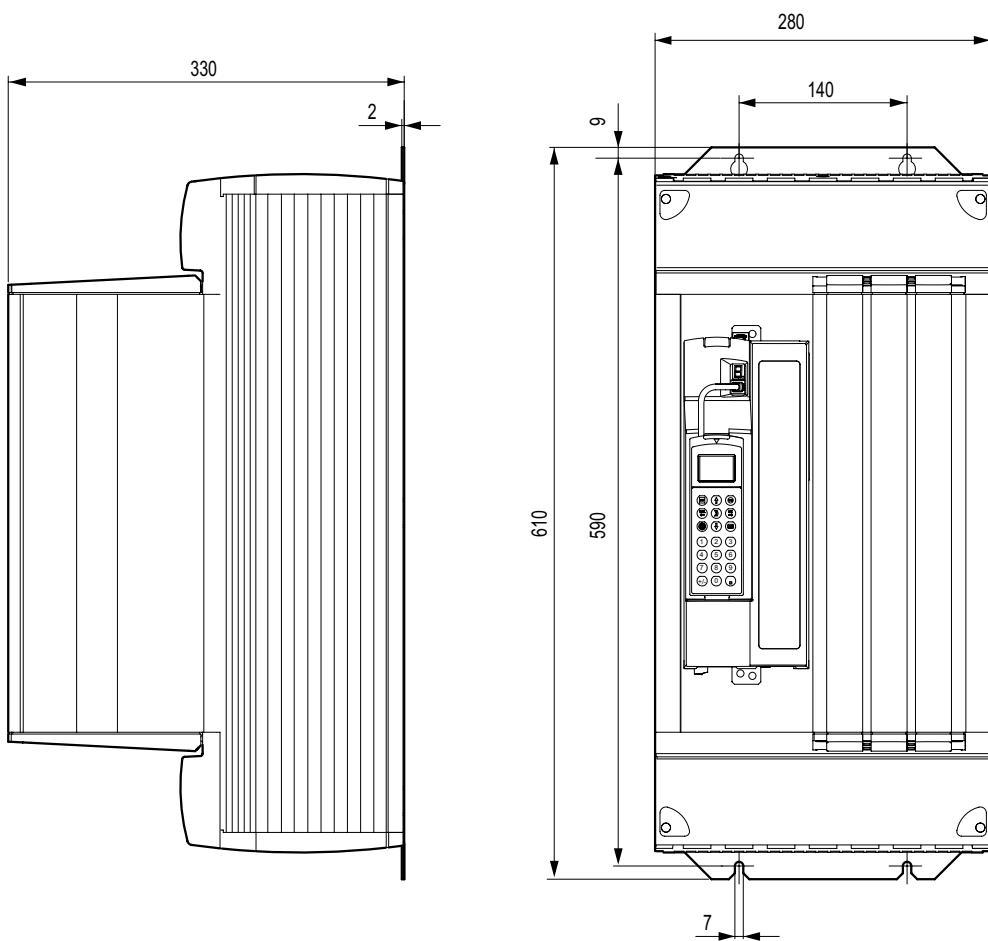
Dimension drawing for MDX61B size 4, dimensions in mm
